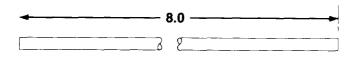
Purge Air Hose Assembly (31-15-2302-120)
